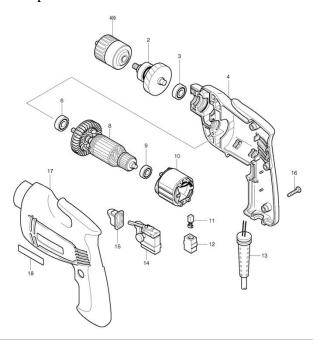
Tool diagram for a Makita 6406 power drill [10].
